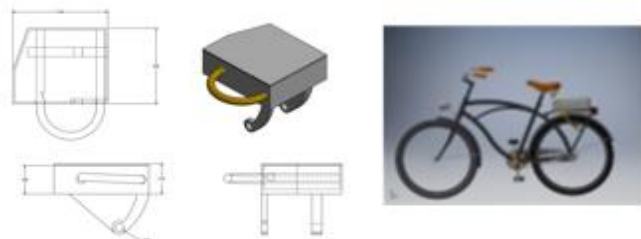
CAD rendering of 'smart lock' case and its mounting on the backseat of a bicycle
